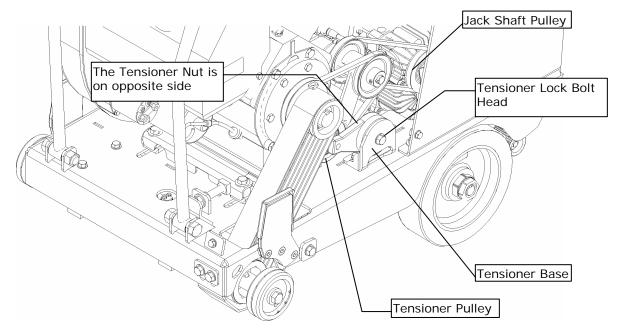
Jack Shaft Belt and Rotary Belt Tensioner System
